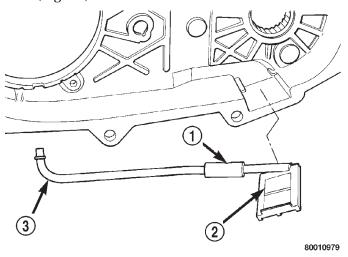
Oil Pickup Screen, Hose And Tube Removal
